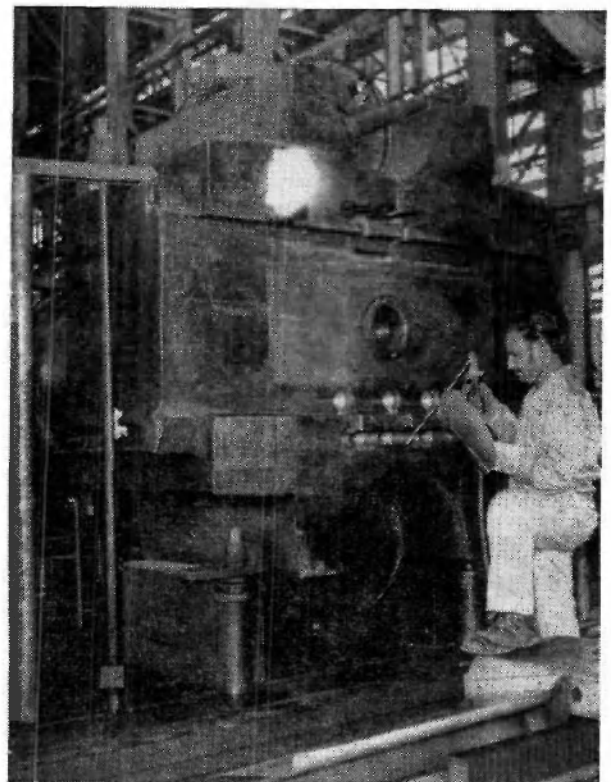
Repair of D.G.H. 25 TUP with Key-Lock Fusion Welding
